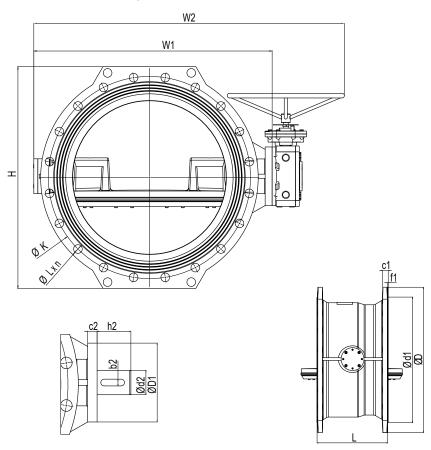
Sectional drawing PN 25 DN 100 - 700
